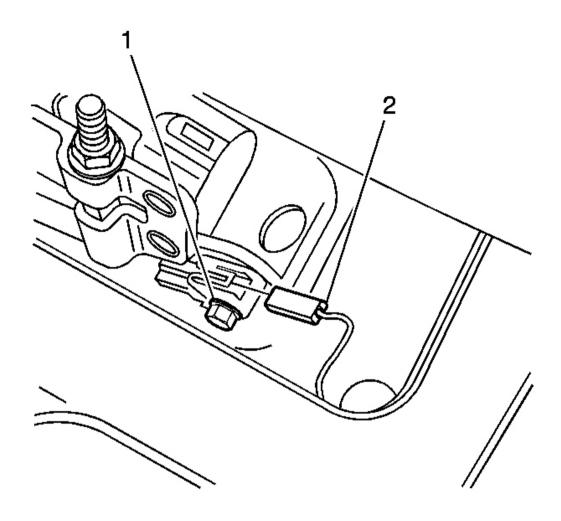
View Of Park Brake Warning Lamp Switch Courtesy of GENERAL MOTORS CORP.
